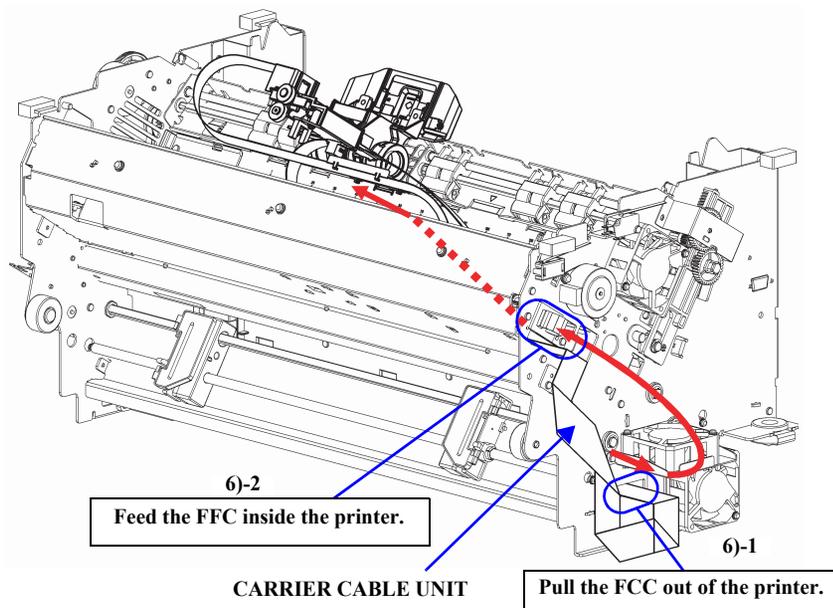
CARRIER CABLE UNIT Removal (2)
